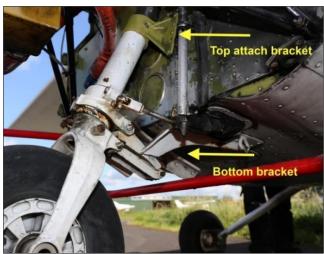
Damage to nose oleo upper and lower attachment brackets
